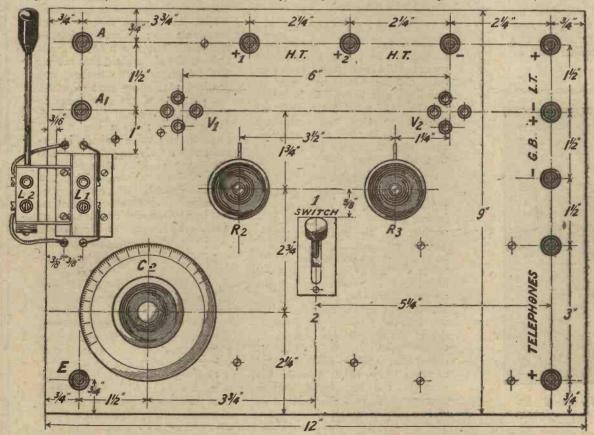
Drilling dimensions and all details relating to the layout of the panel may be obtained from this illustration.
